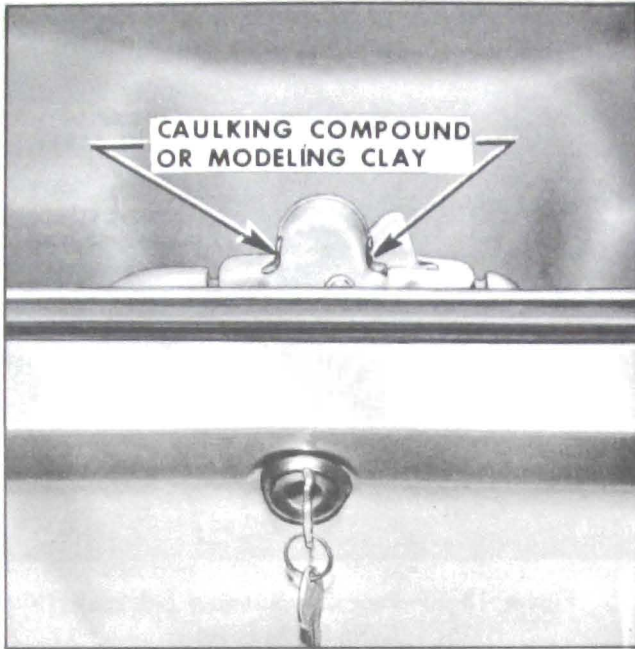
Rear Compartment Lid Lock Striker Engagement Check
